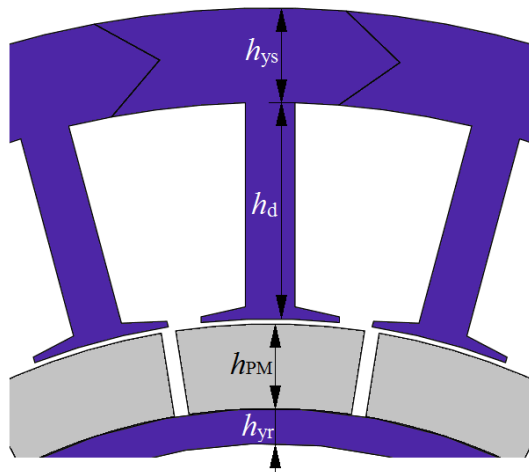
PMSM component dimensions that determine the increase in the air gap diameter if the machine is rearranged to an outer rotor structure.
